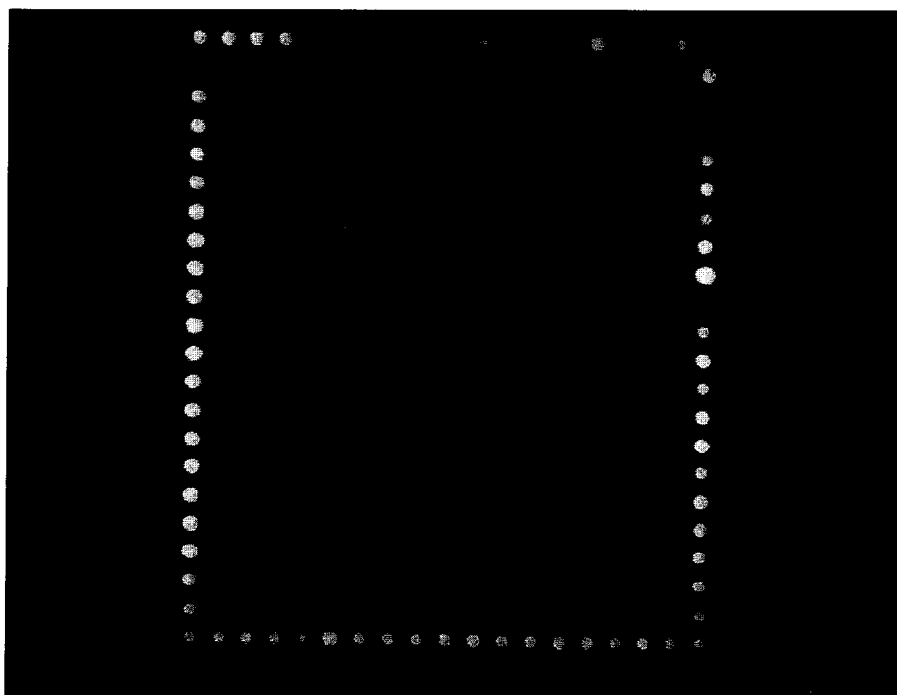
Imaged acoustically from bottom side through its silicon substrate, this device shows both missing and undersized solder bumps. The latter may pass electrical tests only to fail later. Note missing bonds (top) and variation in size of solder bonds. Minute bonds (top middle) may be electrically satisfactory now, but can be mechanically weak which means a shortened working life for the device. Note, no underfill is present in this sample.
